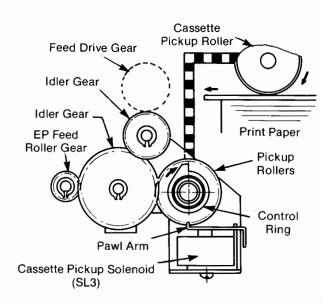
Cassette Pickup Assembly HP 2686A (Engaged)
